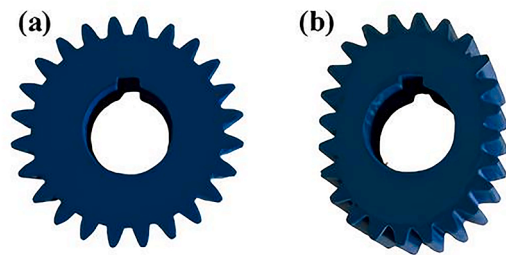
(a) Manufactured spur gear and (b) Elliptical gear.
